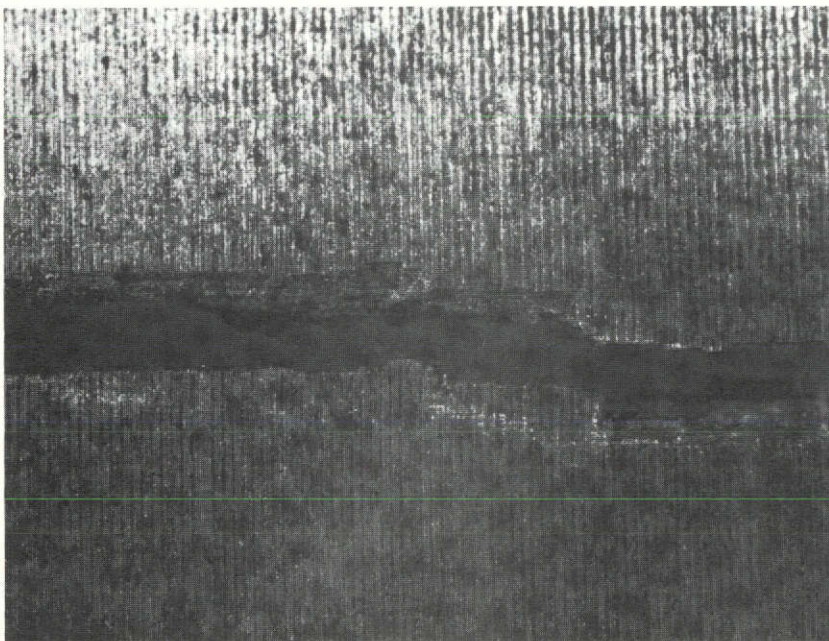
Fracture Surface of Burst Tested Carbon Steel Cylinder Showing Brittle Fracture, 8X
